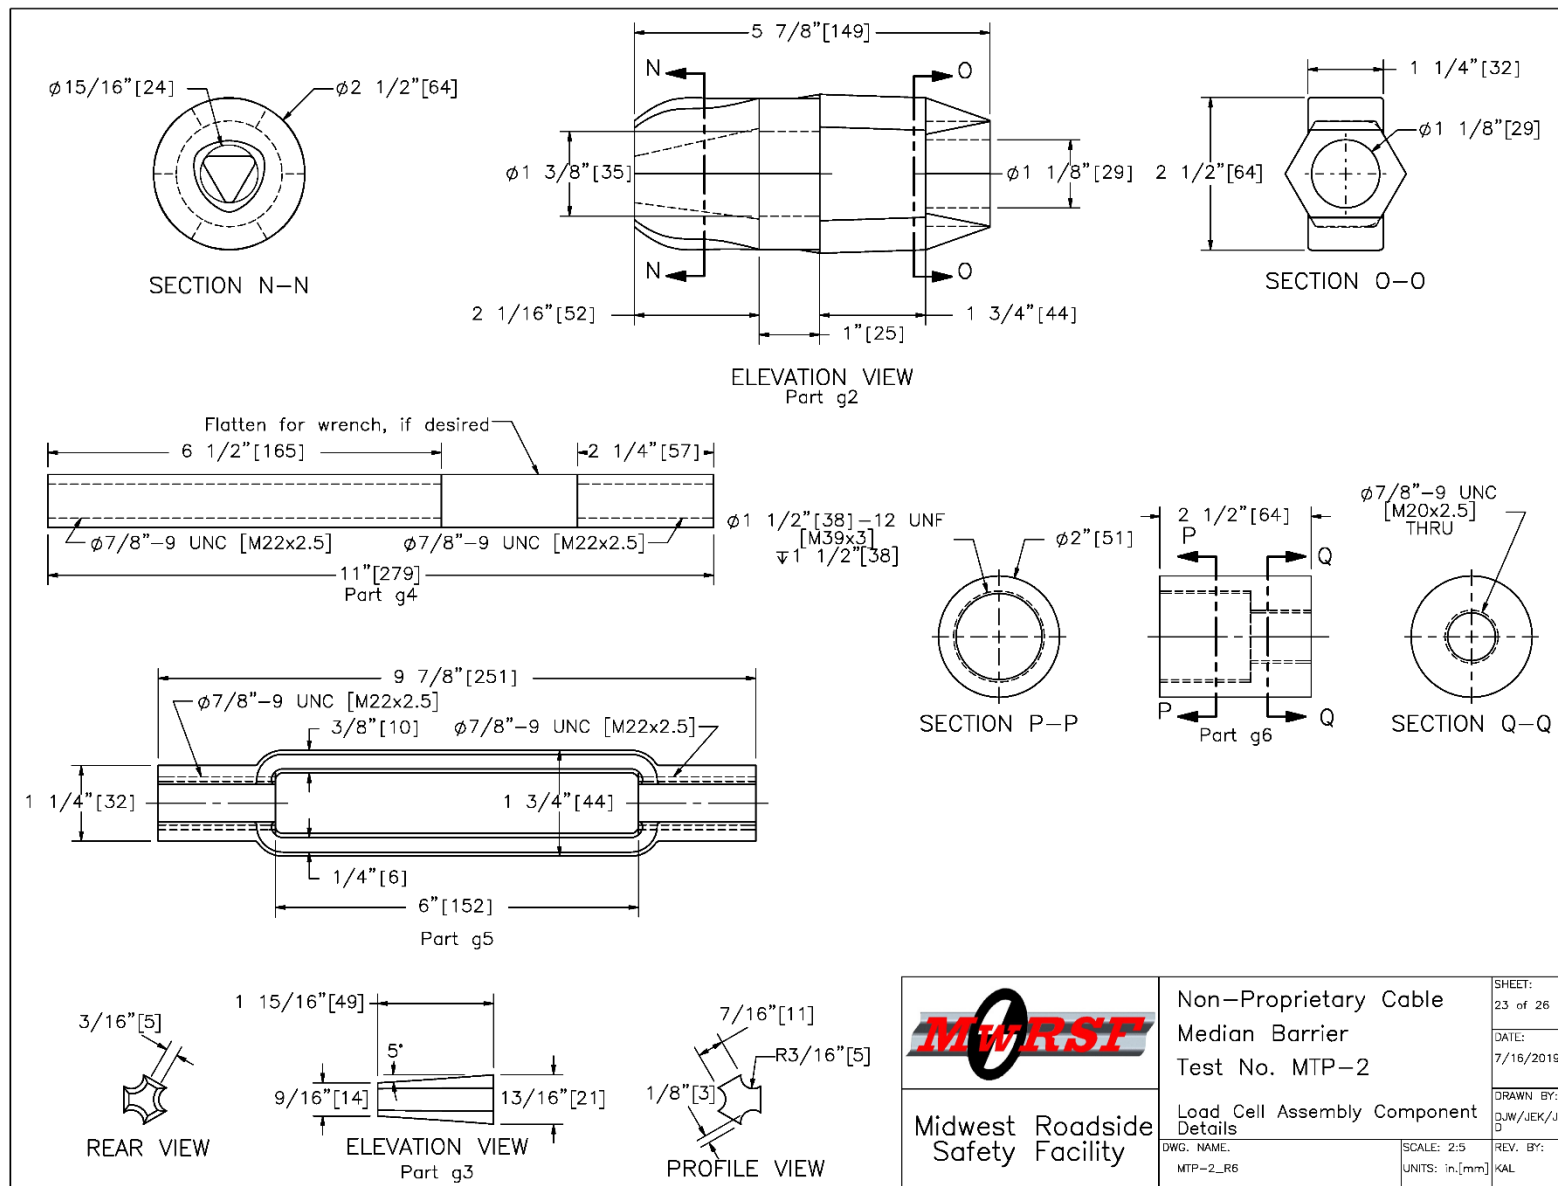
Load Cell Assembly Component Details, Test No. MTP-2
